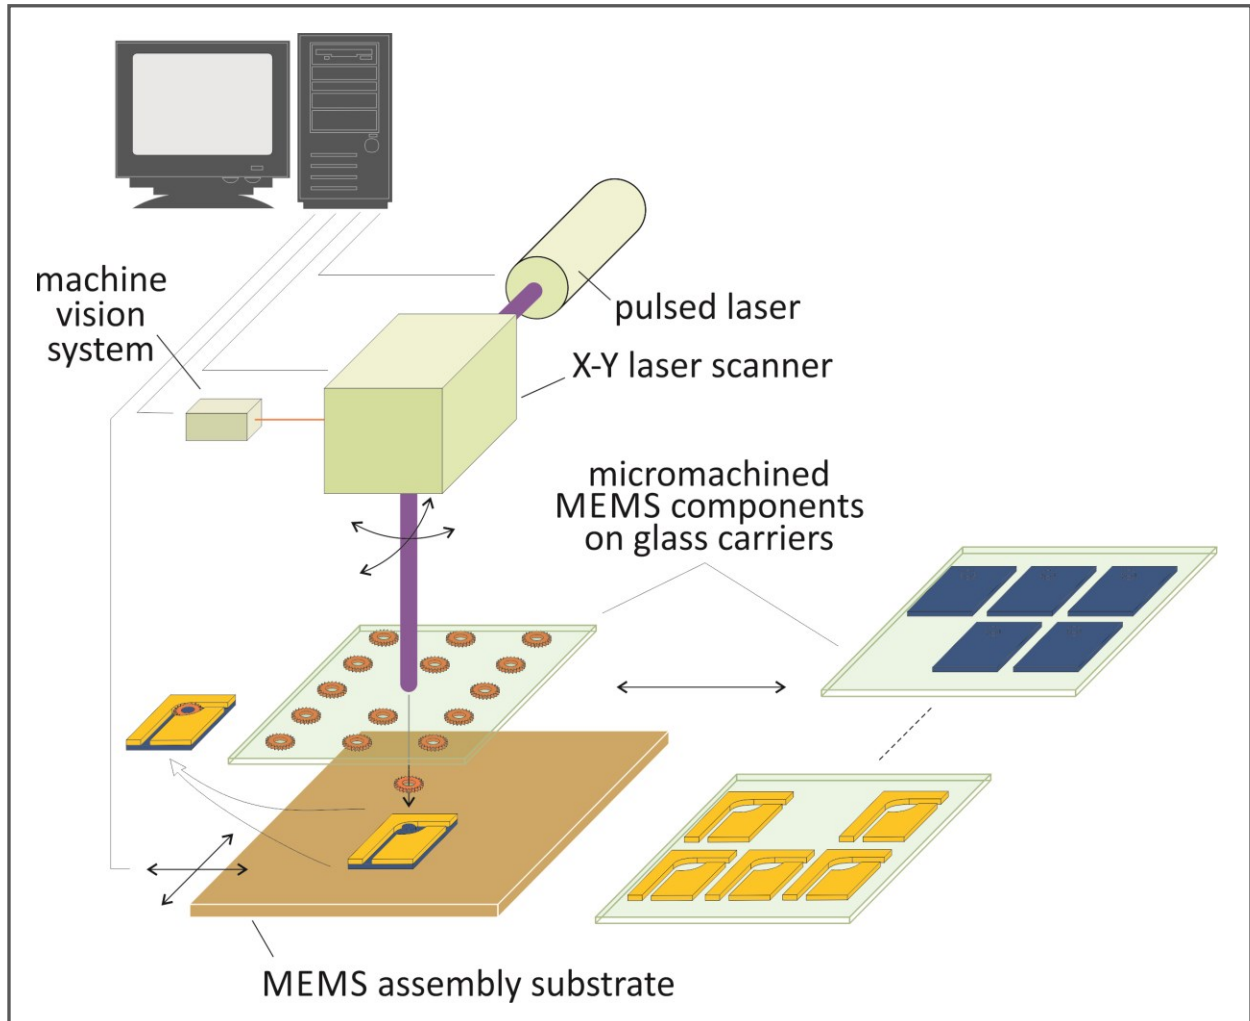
Schematic of Laser-Assisted Advance Assembly (LA³) process for hybrid assembly.
